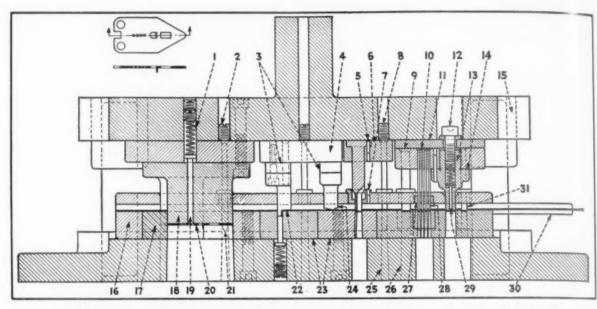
The numbers here refer to the check list given in the text under preventing punch and die failure. (Figure courtesy of Moore Special Tool Co.).
